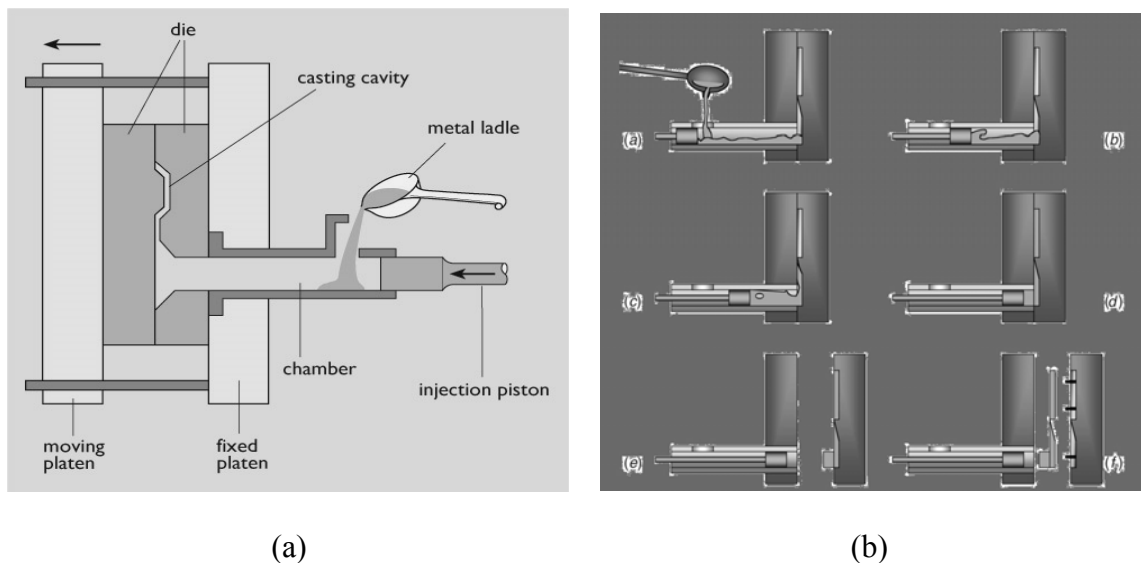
a) Schematic of Cold chamber die casting process, b) Casting cycle for cold chamber die casting process [25].
